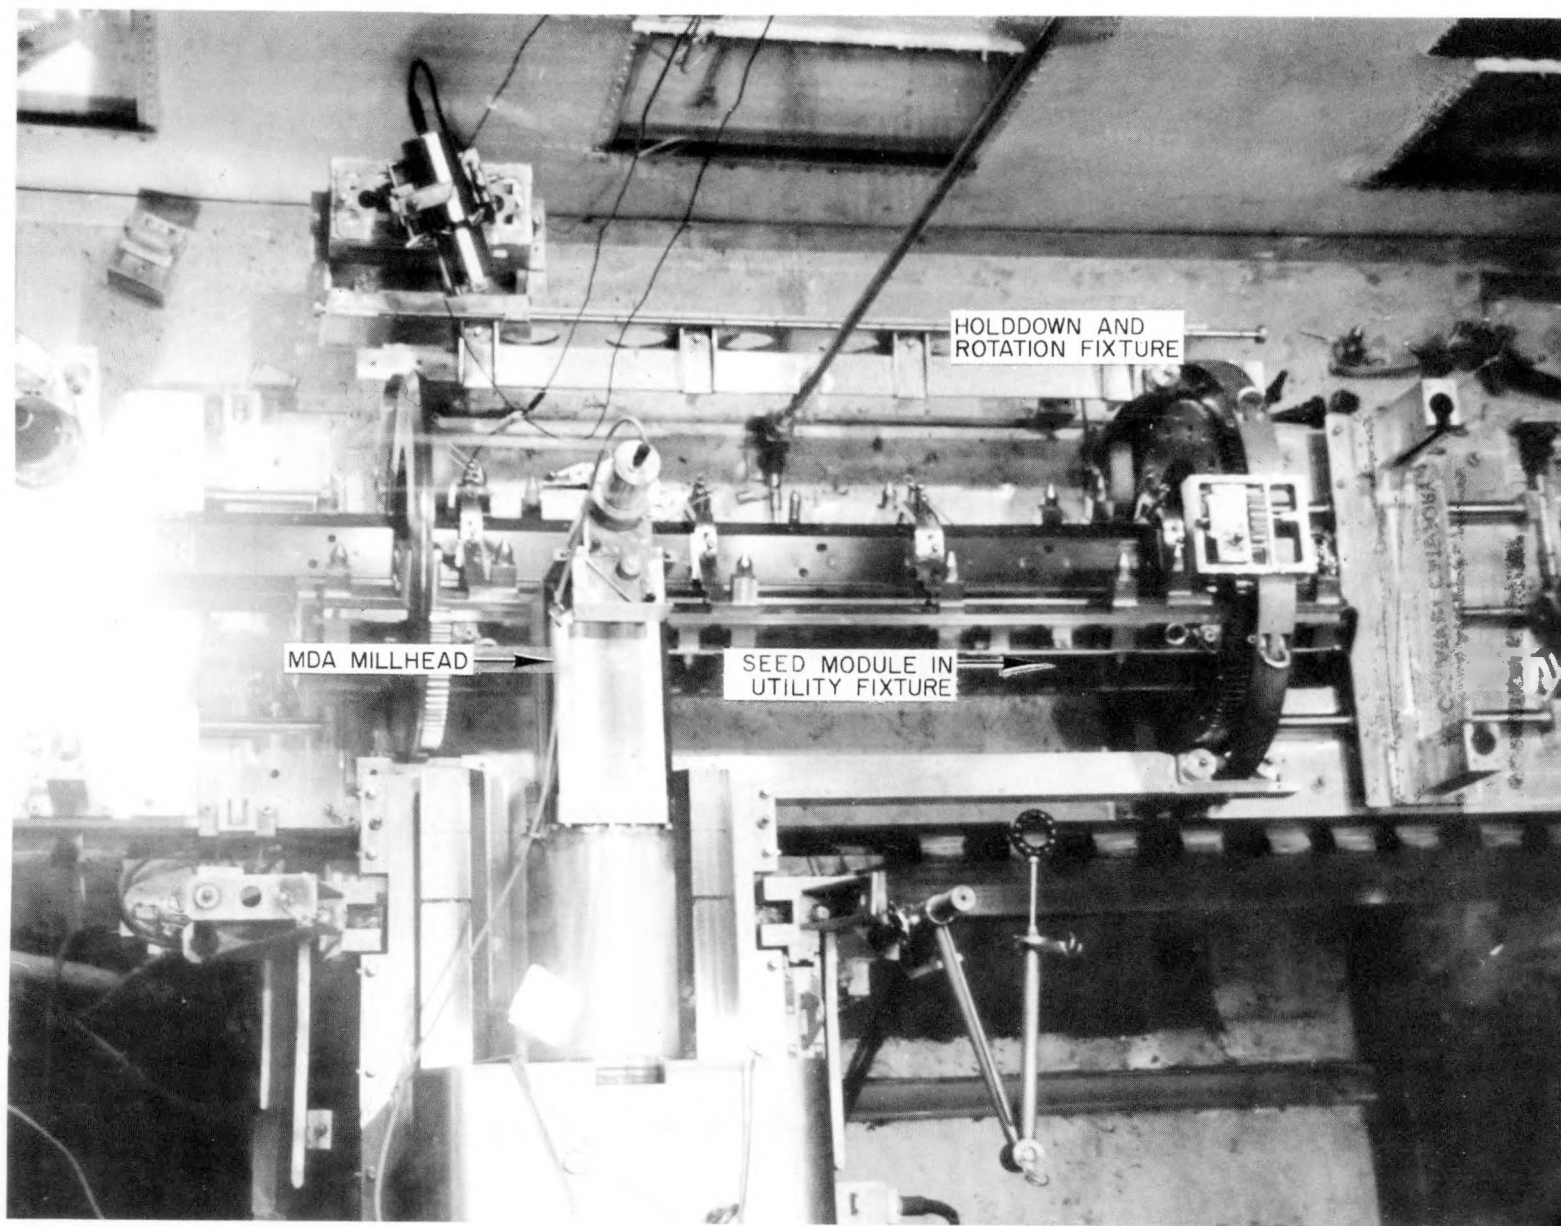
LWBR Holddown and Rotation Fixture in Operation
